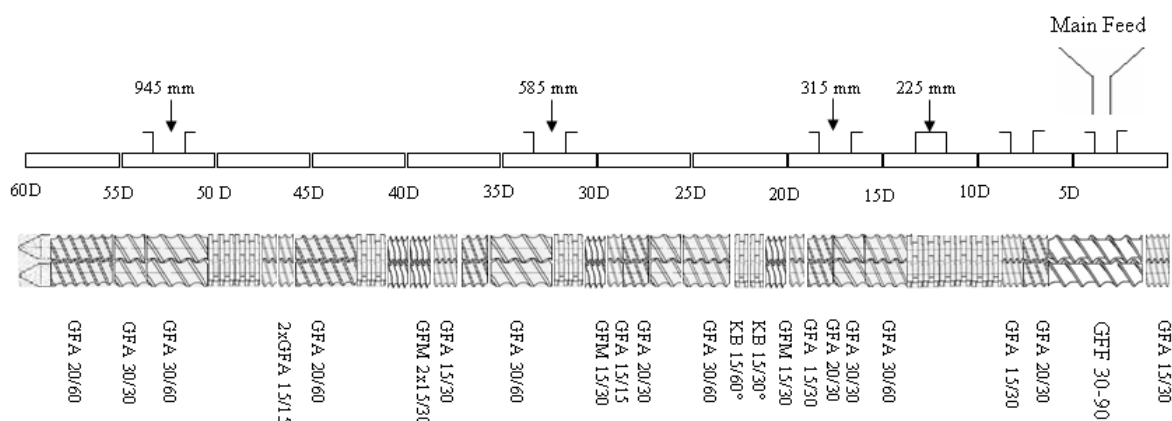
Screw configuration of the co-rotating twin-screw extruder (ZSE 18HP).
